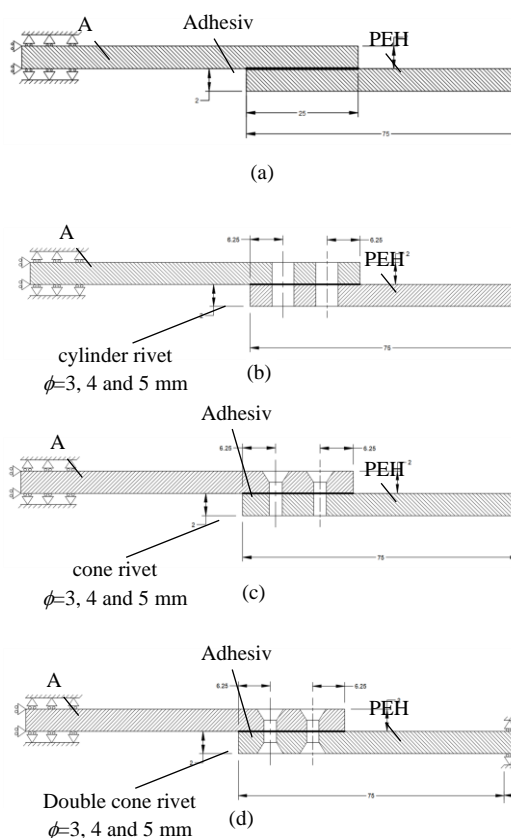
Geometrical configurations and applied constrain on Finite Element models of a) using adhesive material only, b) using rivets and adhesive material (cylindrical rivet), c) using rivets and adhesive material (conical rivet), d) using rivets and adhesive material (double conical rivet)
